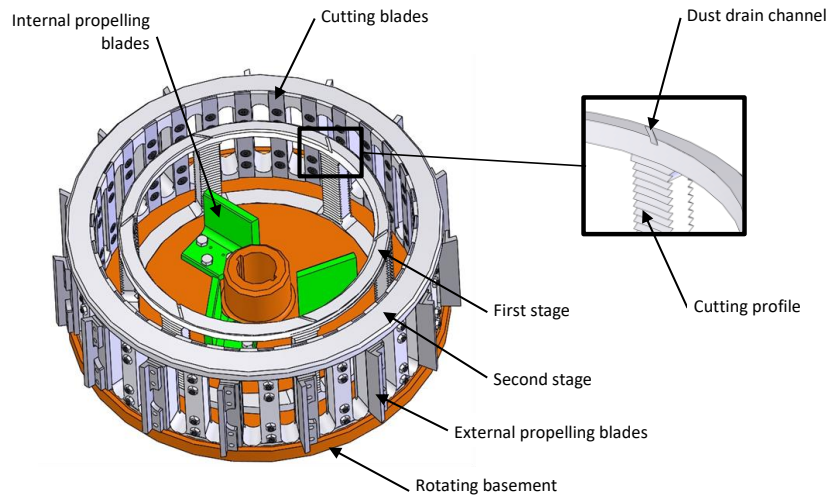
Rotor assembly (to provide a dimensional reference: the external diameter of the rotating basement is 288 mm).
